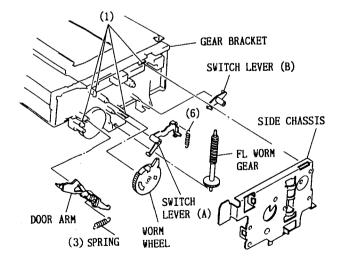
Side Chassis, FL Worm Gear, Door Arm, Worm Wheel and Switch Levers A/B
